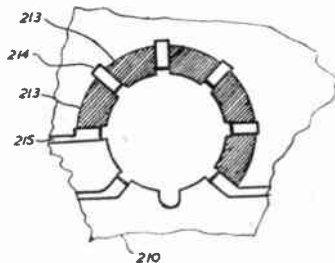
Method of incorporating resistor chain into the moulding such as is used with electron multipliers.
